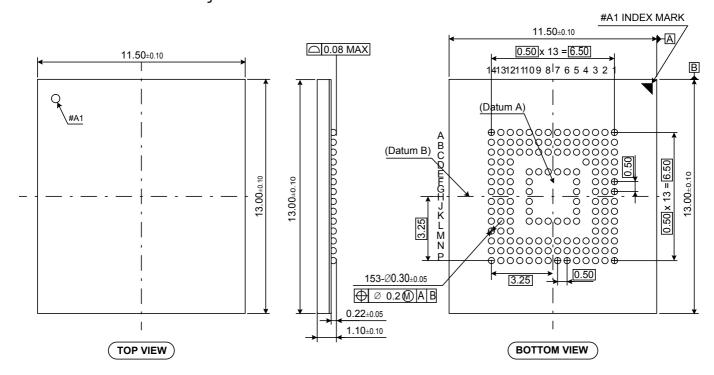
11.5mm x 13mm x 1.2mm Package Dimension
